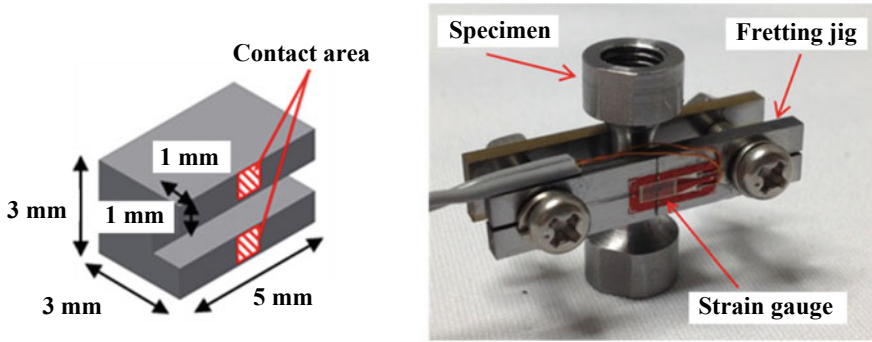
Contactor and a specimen with a clamping fretting pad
